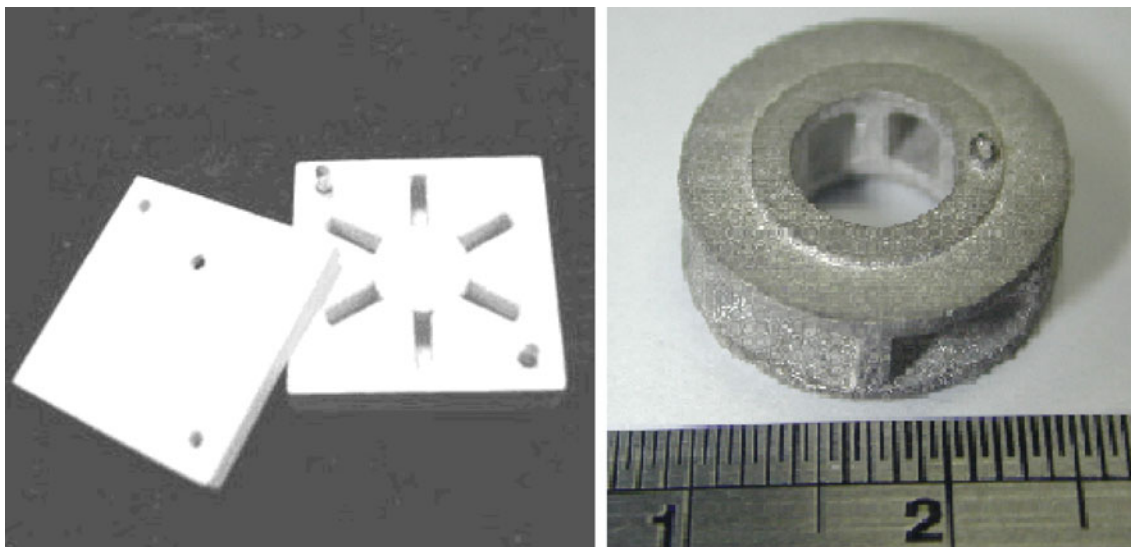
A casting waterwheel made by a ceramic shell mold fabricated with the process of CLS
